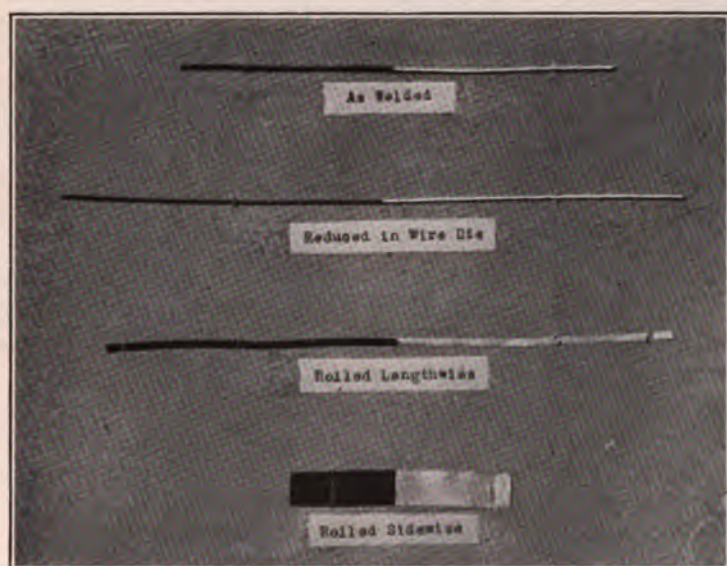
Copper and aluminum wires welded by electro percussive process, showing various tests made.
